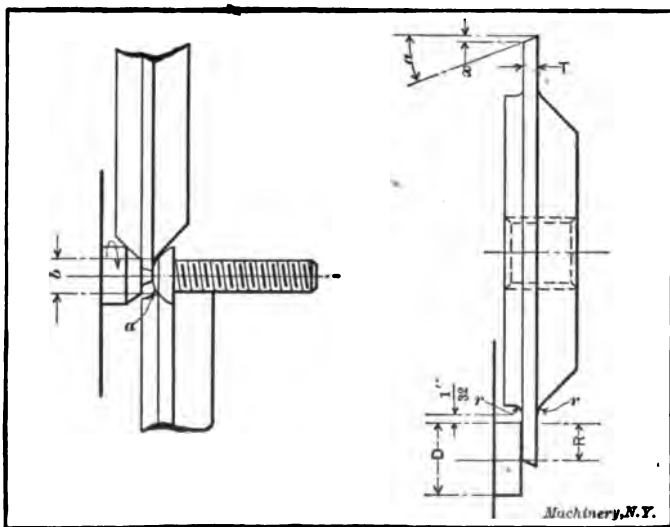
Spherical Screw Head formed by Combination of Forming and Cut-off Tools
